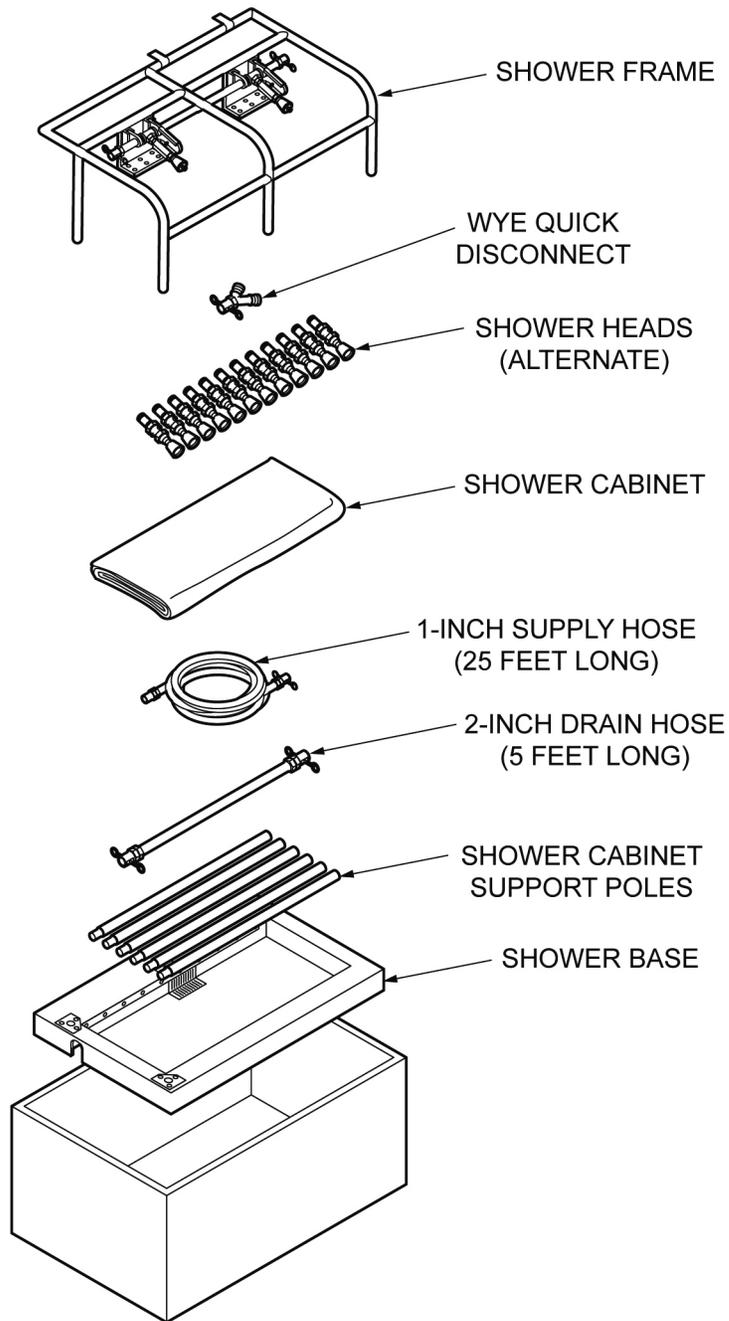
Packing the 12-Head Shower (Sheet 2 of 6).
